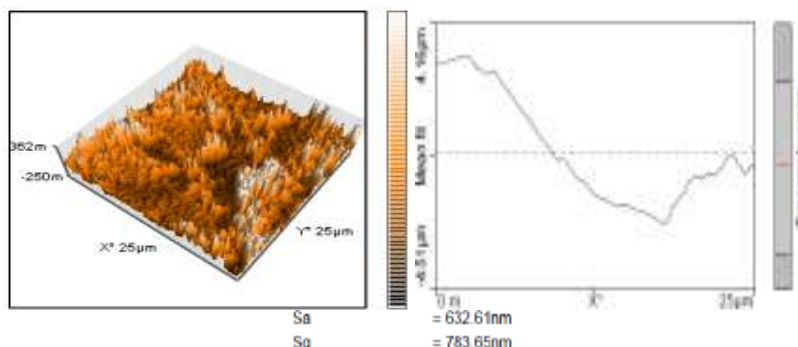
Surface topography of bearing sleeve made of gun metal. 3D view and cross-section, for used bearing sleeve
